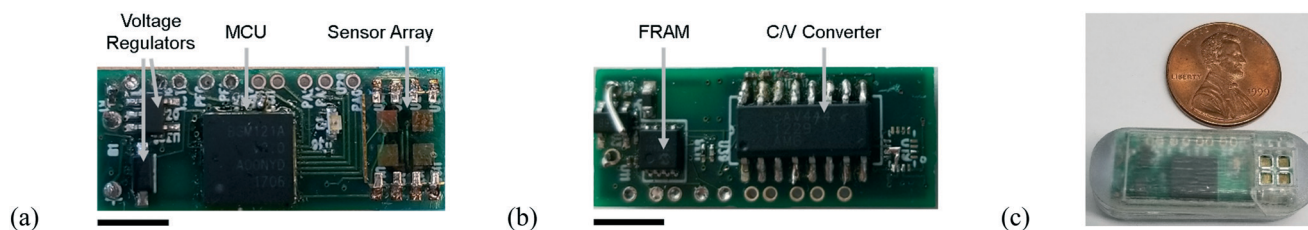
(a) Top and (b) bottom views of sensor PCB assembly (SPA), and (c) photograph of assembled capsule. Scale bar = 5 mm.
